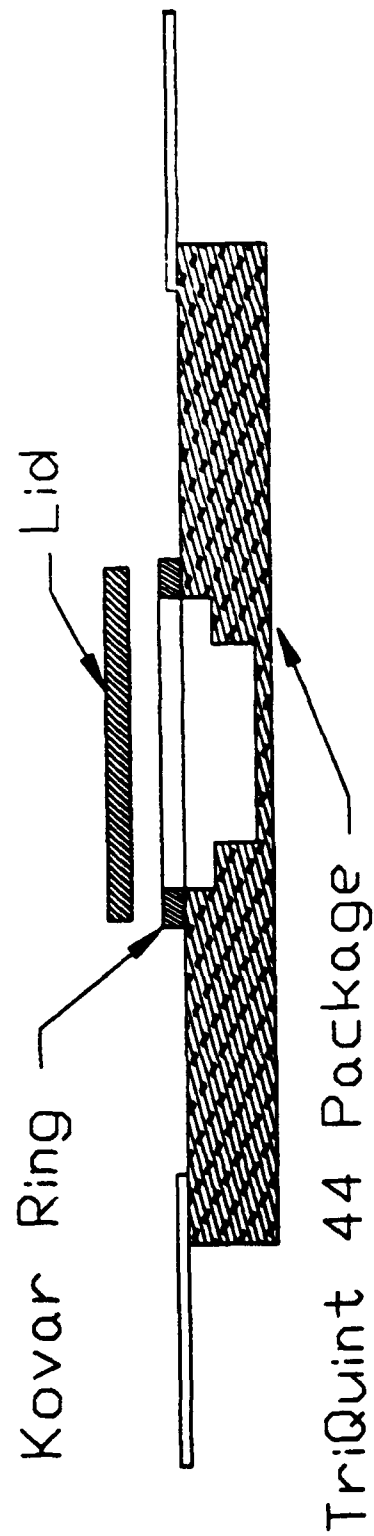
Cross-Section of TriQuint 44 Package, Showing Seal Ring
